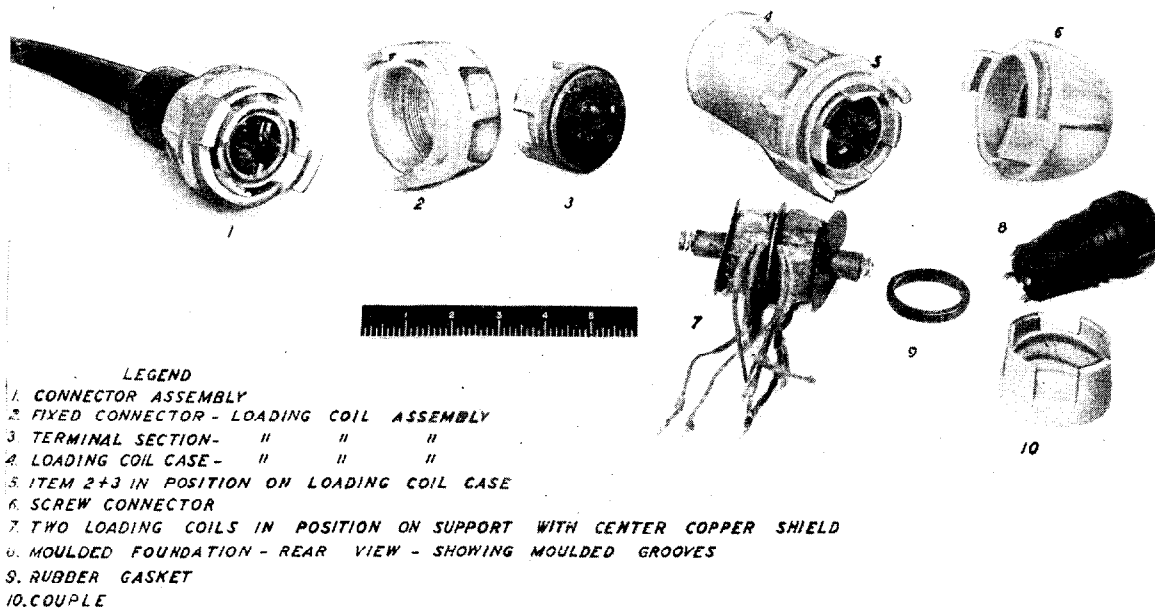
"Spiral-Fow" field telephone cable unassembled.
